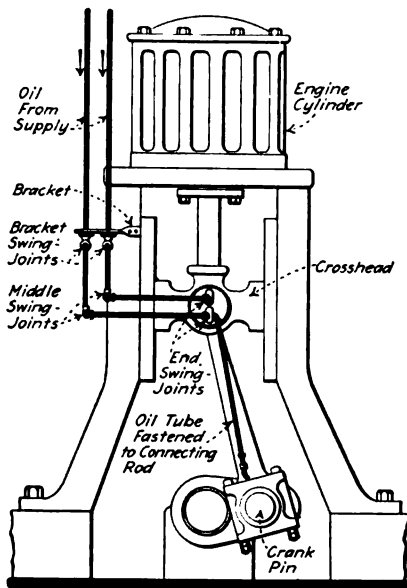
Vertical engine equipped with swing joints for supplying oil to crank and crosshead pins.
